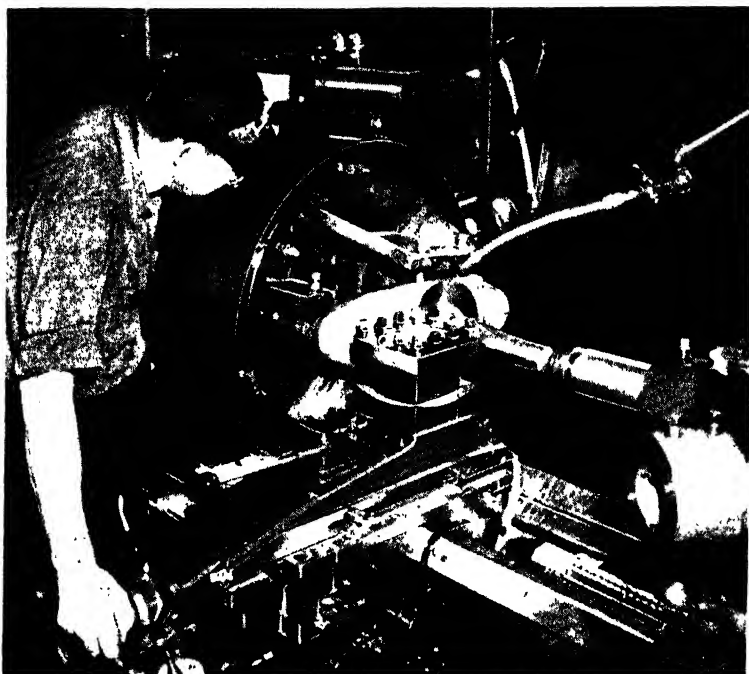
Turret Lathe in which Straight and Taper Sections are Turned on the Spindle of Bogie Fulcrum Forgings, and a large Diameter Faced
